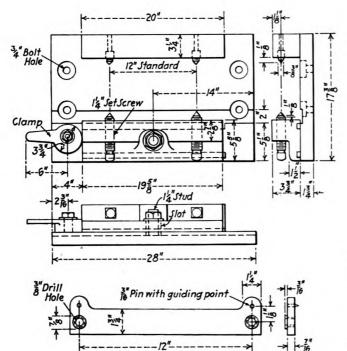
Chuck that automatically lines up shoes and wedges for machining to layout marks
